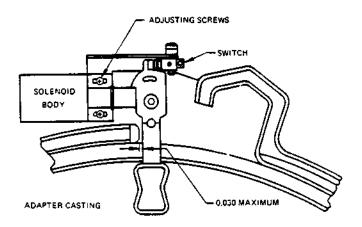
Adapter Casting and Lock-Arm Clearance
